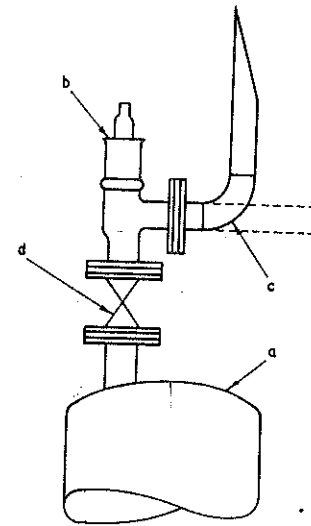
Relief valve with shut-off valve (a) vessel (b) relief valve
